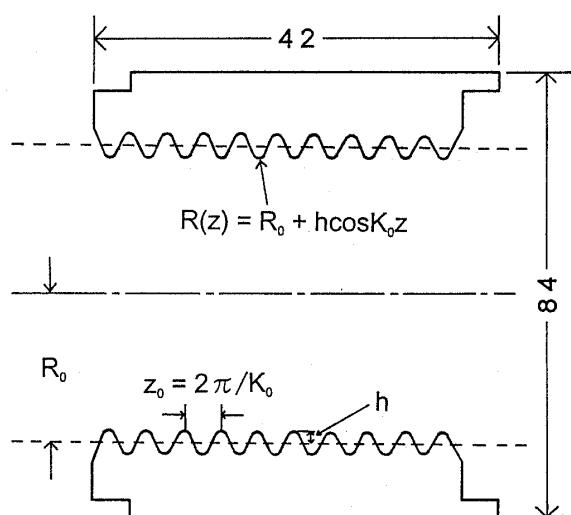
Cross sectional view of the section of designed slow wave structure.
